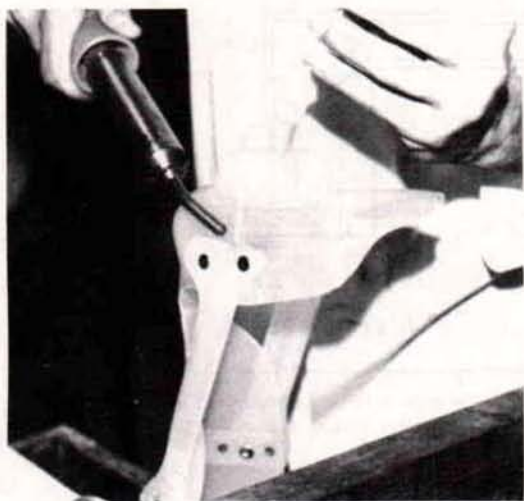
The welding rod is held at 90 deg. to the seam when the round welding tip is used.
